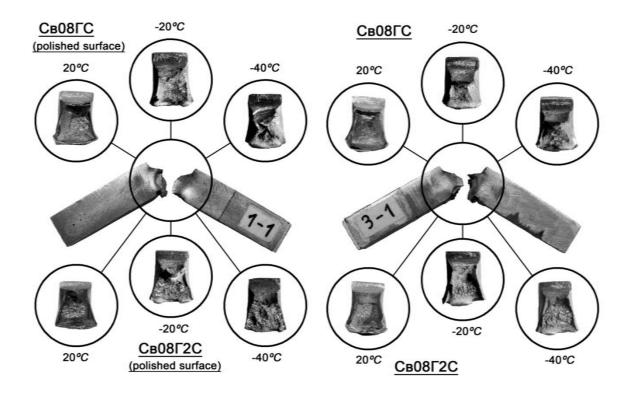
Fracture of the specimens obtained by welding in argon-based shielding gas mixtures (82%Ar+18%CO₂) with the use of various welding wires at different ambient temperatures
